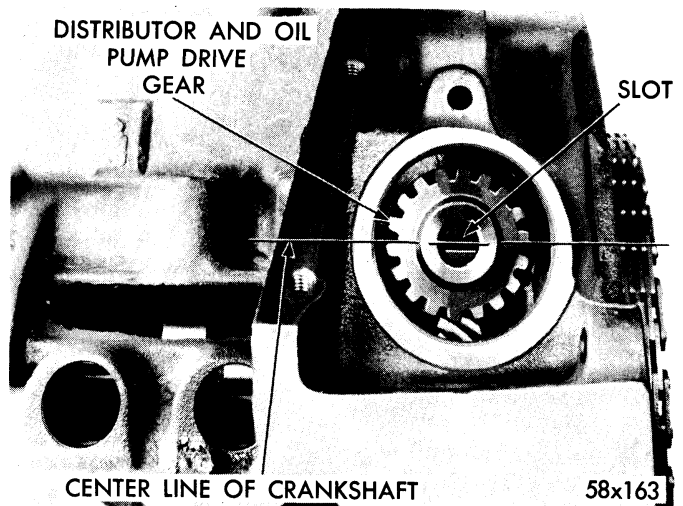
Position of Distributor Drive Shaft—350 Cubic Inch V-8 Engine
